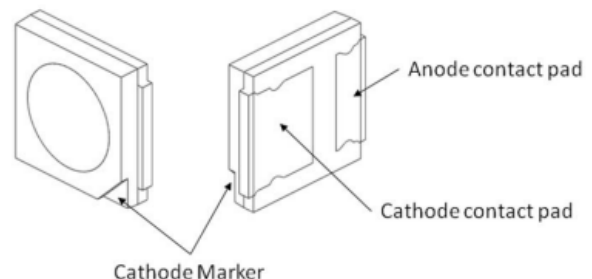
LED Package Rendering Including Solder Footprint (Refer 1)
